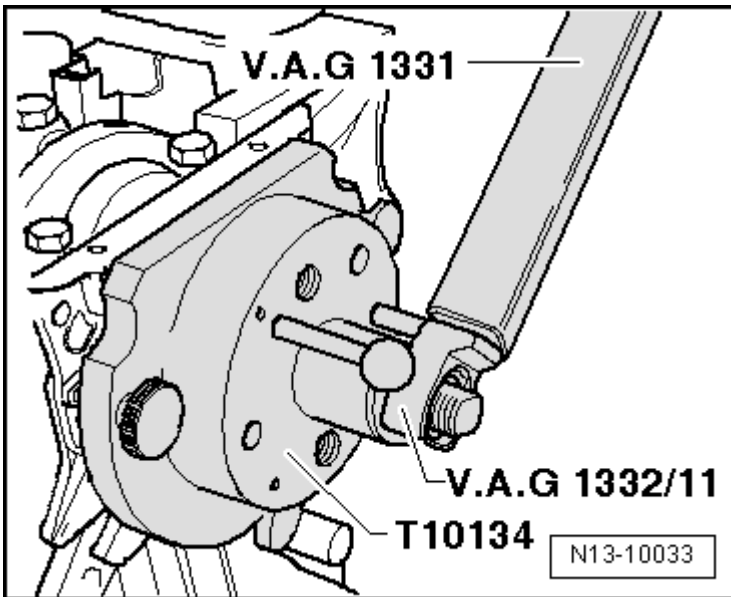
Identifying Sensor Wheel Pressed With Assembly Tool T10134 Onto Crankshaft Flange
